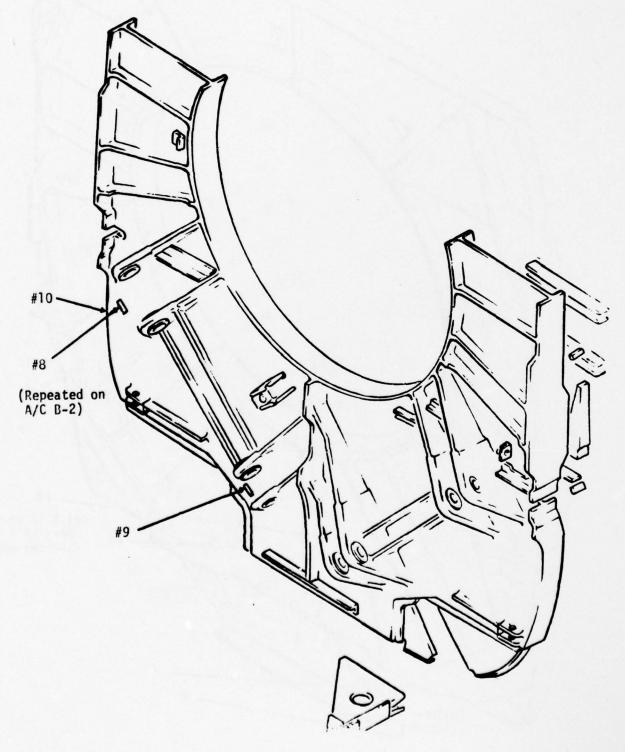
215-30402 BULKHEAD FITTING FORWARD SIDE, AS MACHINED. 4.11
